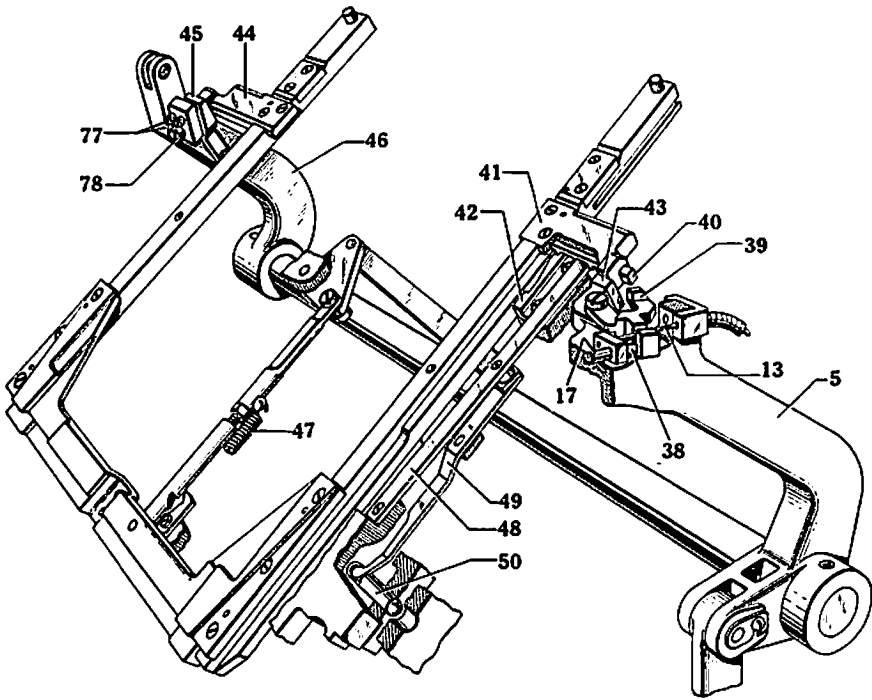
Magazine Releasing and Lifting Mechanism. The left-hand lifting lever 46 and the right-hand lever 5 raise the lower magazine in operating position to its upper or "shifting" position when the main operating lever is depressed. The bellcrank 39 releases the magazine carriage catch 40 when cable 13 draws rod 17 backward. Cable 13 is operated by the releasing lever at the front of the main operating lever.
